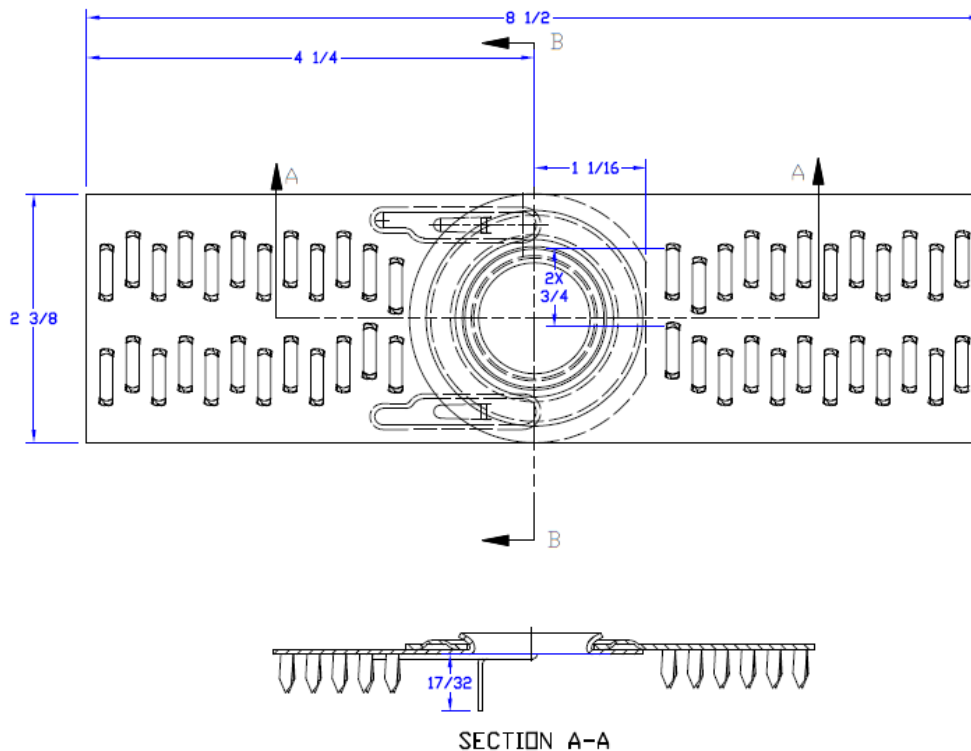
ASHP HINGE PLATE CONNECTOR (DIMENSION IN INCHES)
